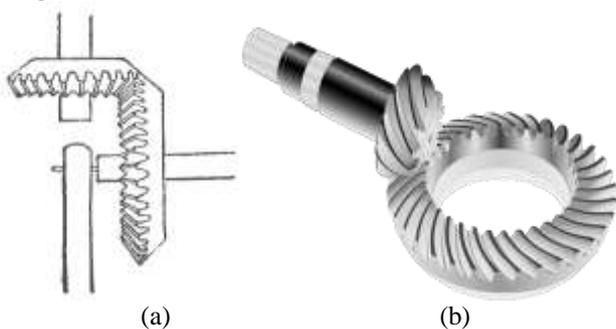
Sketches of (a) straight bevel gear (b) spiral bevel gear
